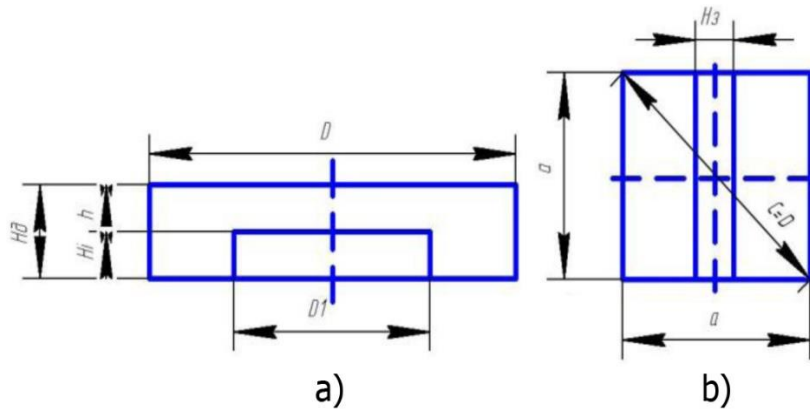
Dimensions of the finished part (a) and the initial blank (b).
